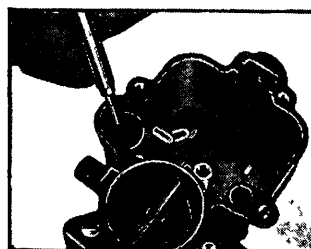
Remove pump retainer ring and ball at bottom of pump cylinder
